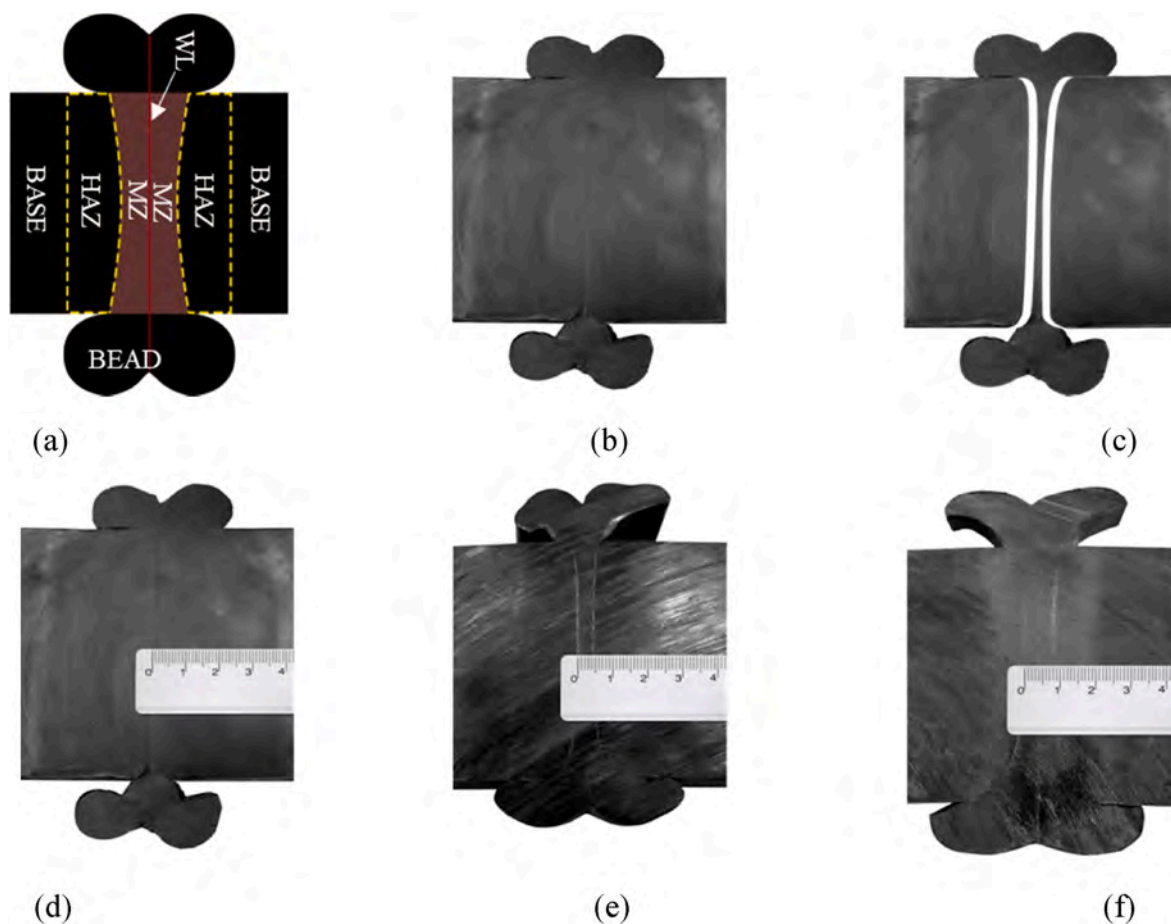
The observation of MZ inside the welding joints for different welding procedures. (a) Diagram of different zones existed at the welding joint (b) Actual profile of the welded joint (c) Manual separation drawing about MZ (d) MZ width of SHP (e) MZ width of SLP (f) MZ width of NEW P.
